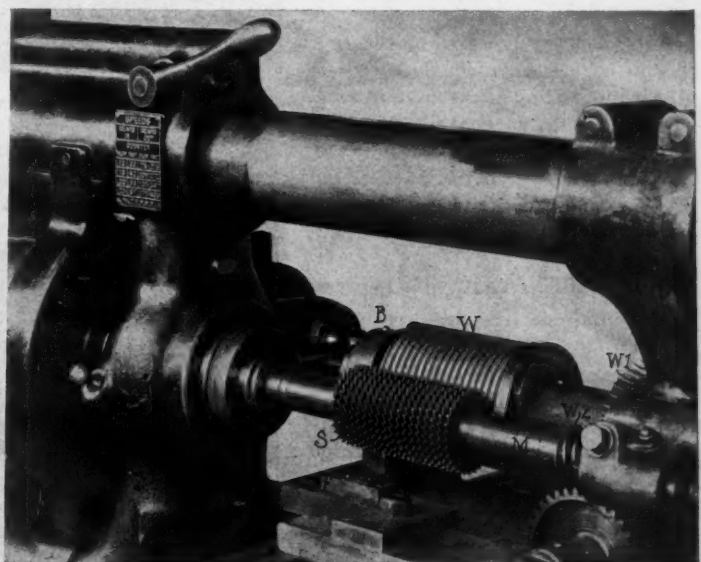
GANGSAW, IN A SPECIAL JIG, FITTED TO A MILLING
